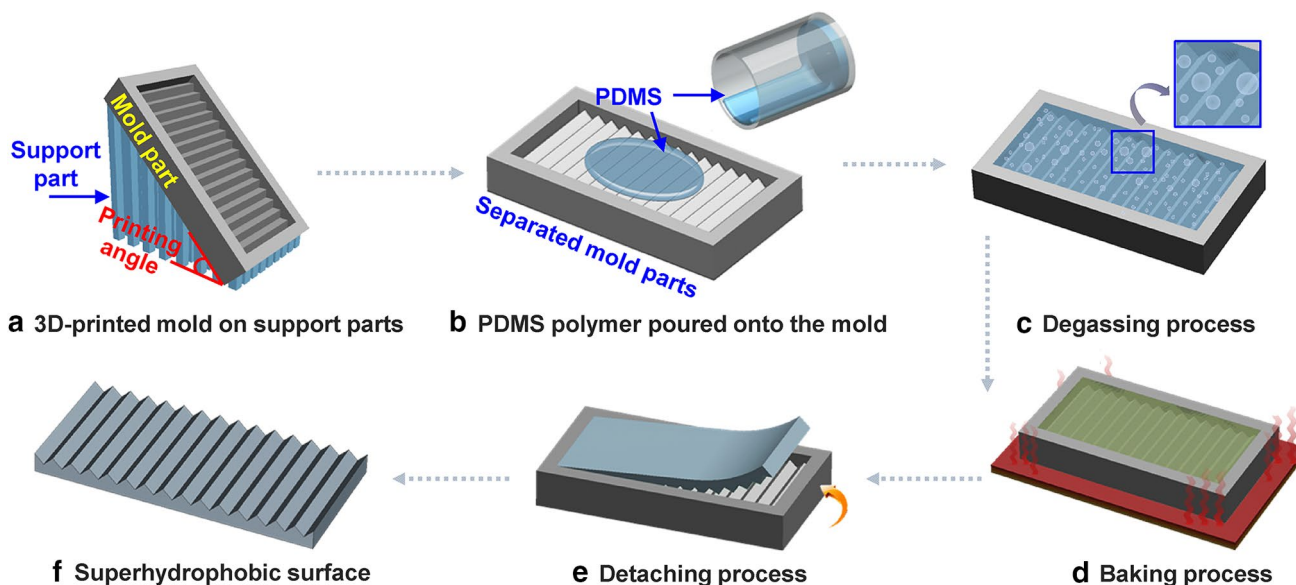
Schematic of overall fabrication process for superhydrophobic polymer surfaces using 3D-printed mold: a printing a mold with a support parts using different printing angles, b pouring PDMS prepolymer onto the mold detached from the support part, c degassing
